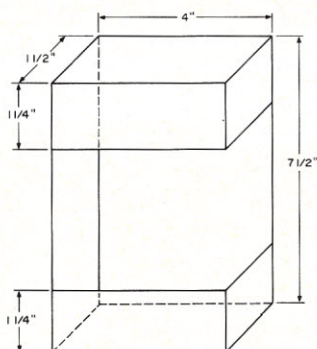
Paper tape supply box. The collection box is a mirror image of the supply box.
